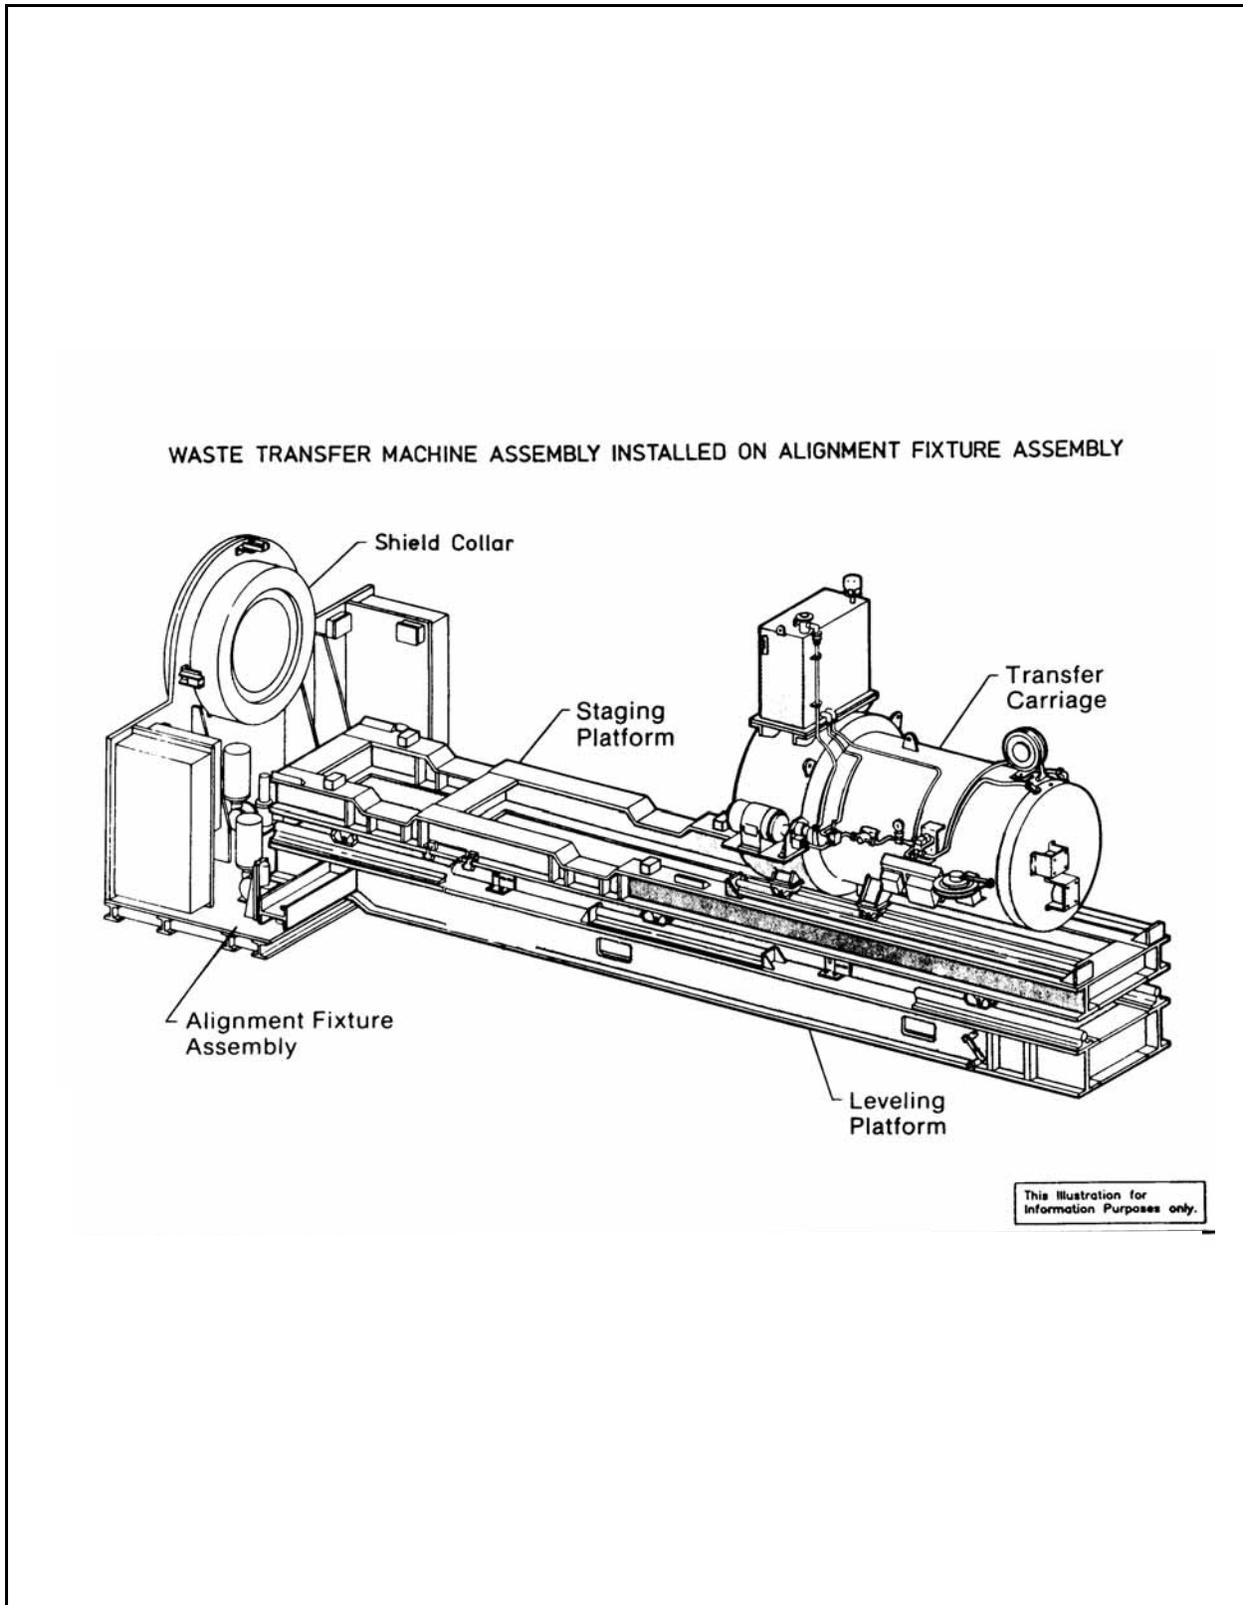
, Waste Transfer Machine Assembly Installed on the Alignment Fixture
